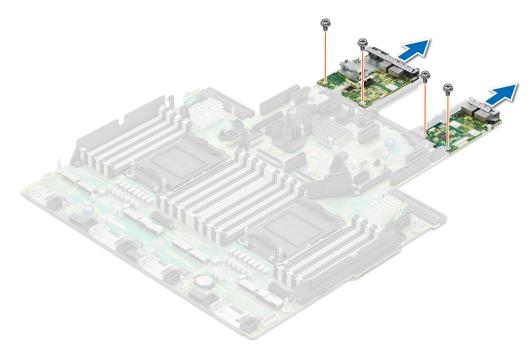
Removing the LOM card and liquid cooling rear I/O board
